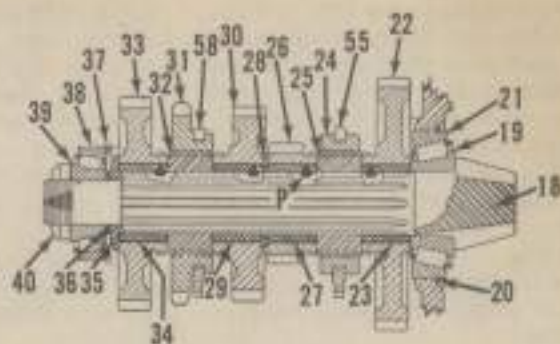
Drawing of the assembled D-14 and D-15 bevel pinion shaft showing pins (P) in their positions in the bushings. Refer to Fig. 115 for legend.
